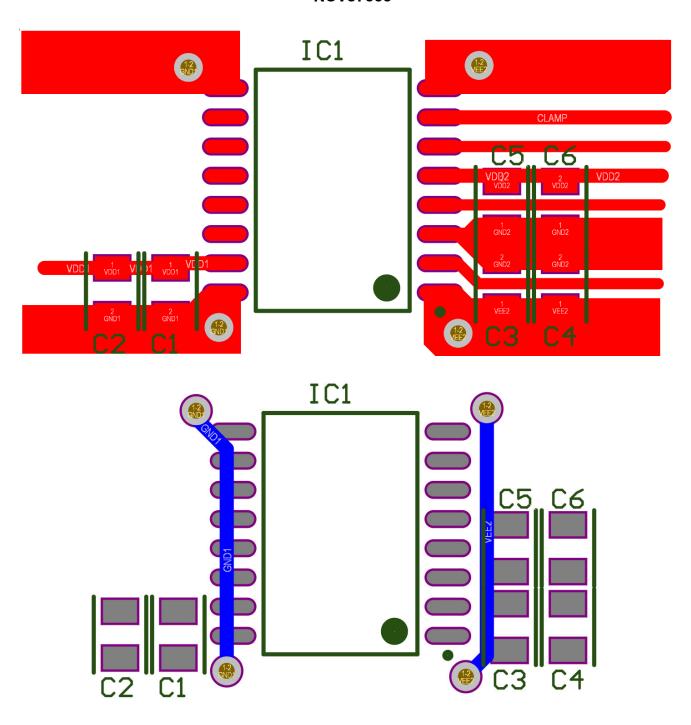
Recommended Basic Bipolar Power Supply PCB Design
